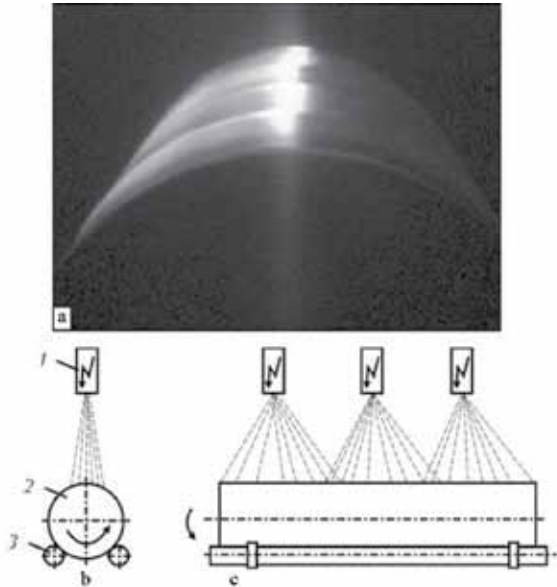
Process of melting the ingot with a cylindrical cross-section: a) external appearance; b) the diagram; 1) electron-beam gun; 2) the ingot; 3) the rollers of the mechanism for rotating the ingot.
